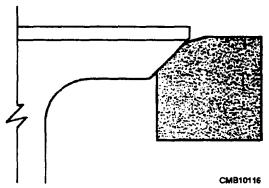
Correct valve-to-seat contact after narrowing.
